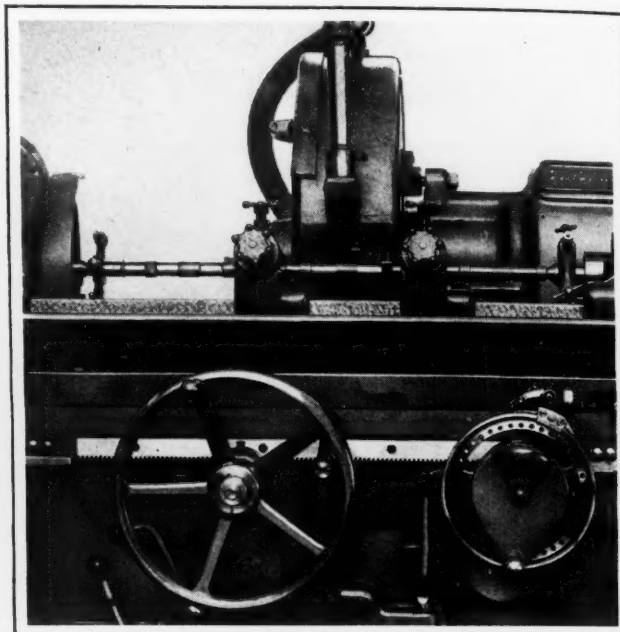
Finishing Two Diameters of a Camshaft Simultaneously by Using Two Properly Spaced Grinding Wheels
